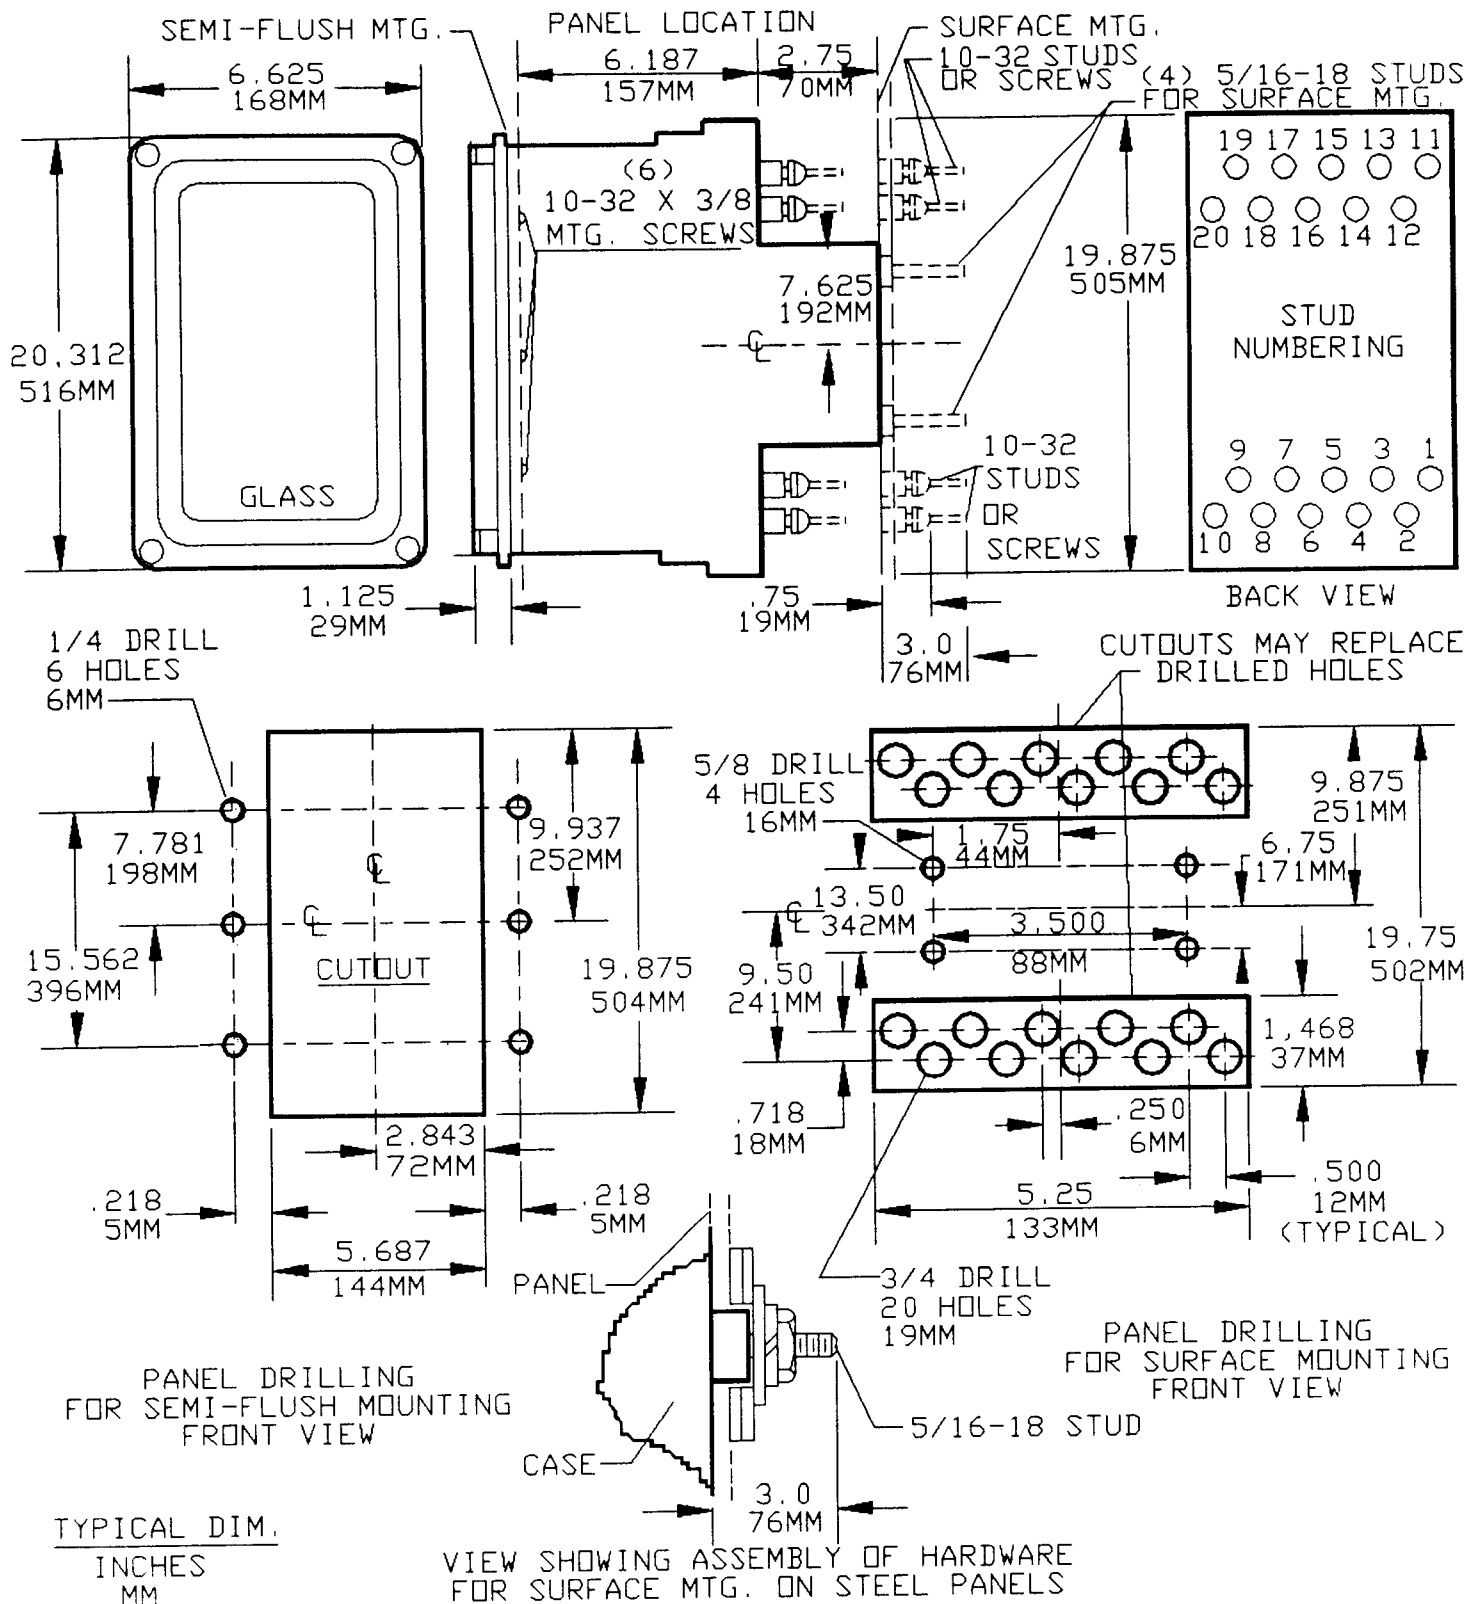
(0178A7336 [6]) Outline and Panel-Drilling Dimensions for Relay Type CEY51A
